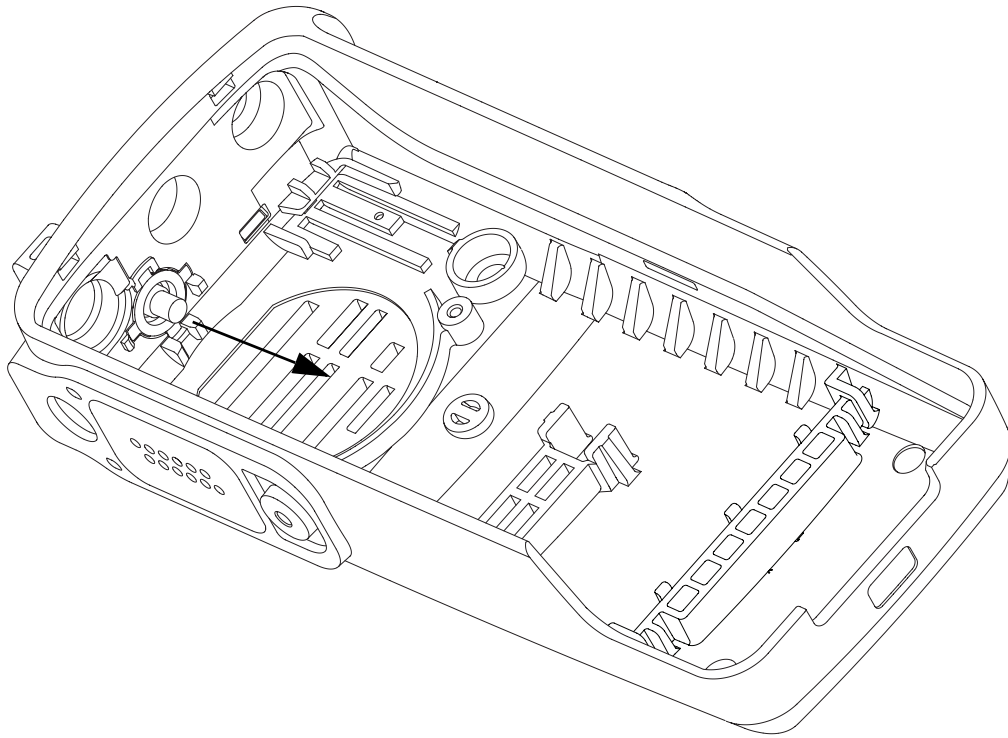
Emergency Button disassembly for Non Keypad Model
